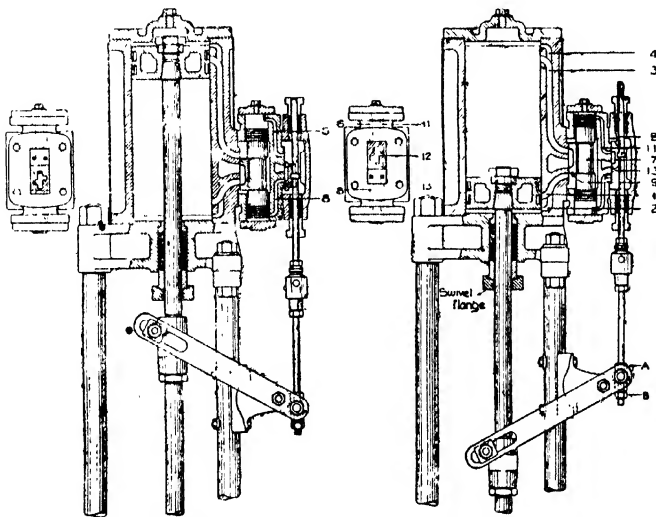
STEAM END OF THE PEARN DIRECT-ACTING PUMP
